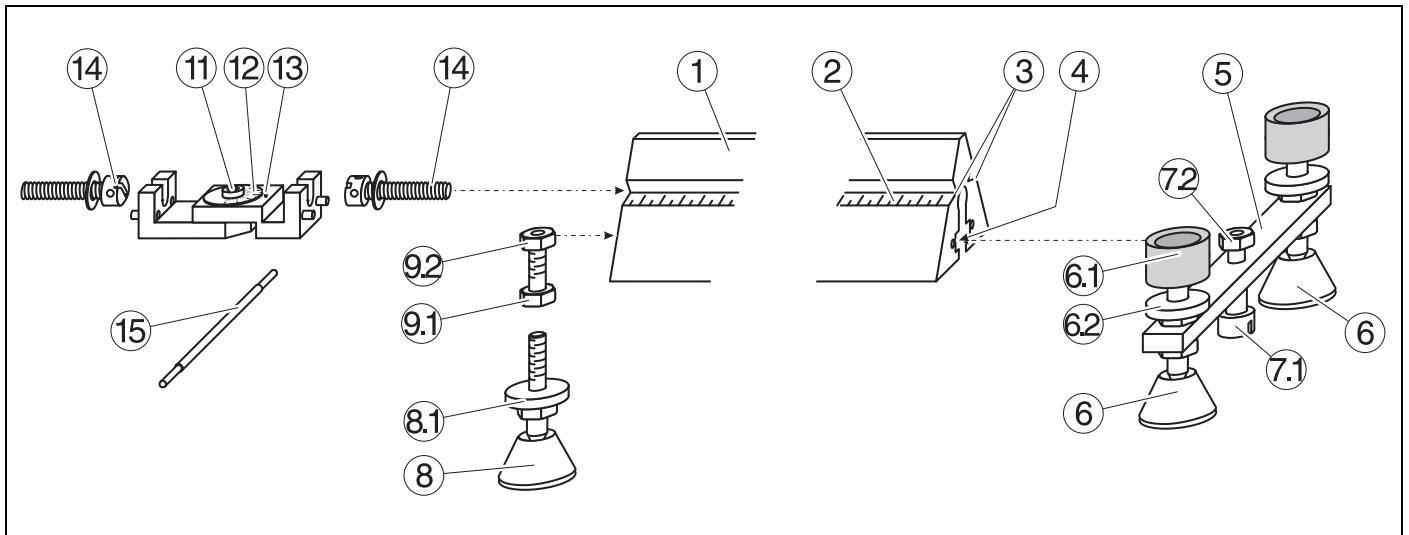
Auxiliary bench with swivel joint and protractor (460 34)
